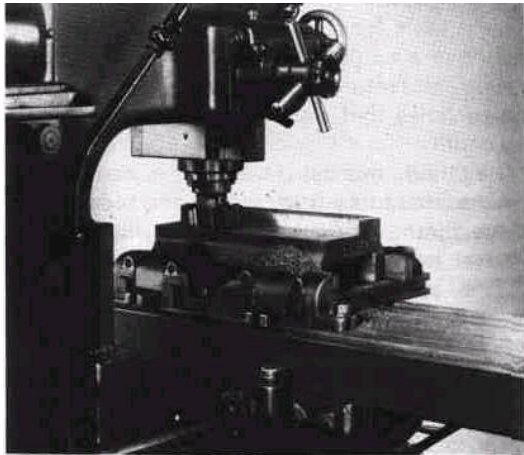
A single heavy-duty plain milling cutter mounted in a vertical milling machine spindle.
